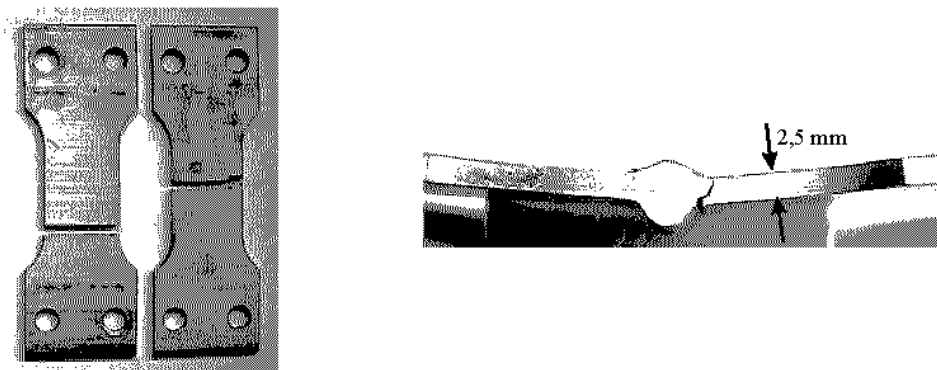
Fatigue failure in the base metal (left) and crack initiation from the root (right).
